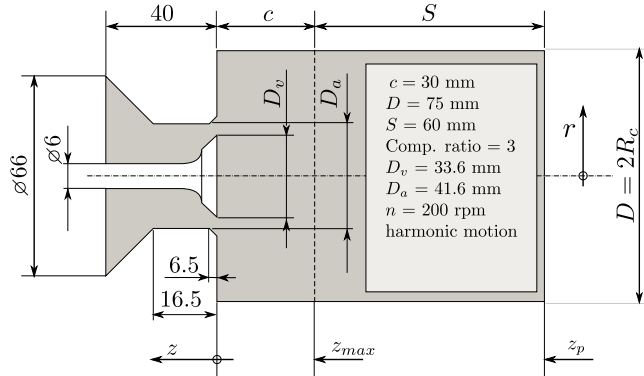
Geometry of the valve/piston assembly. The large upstream plenum connected to the intake section is not shown.
